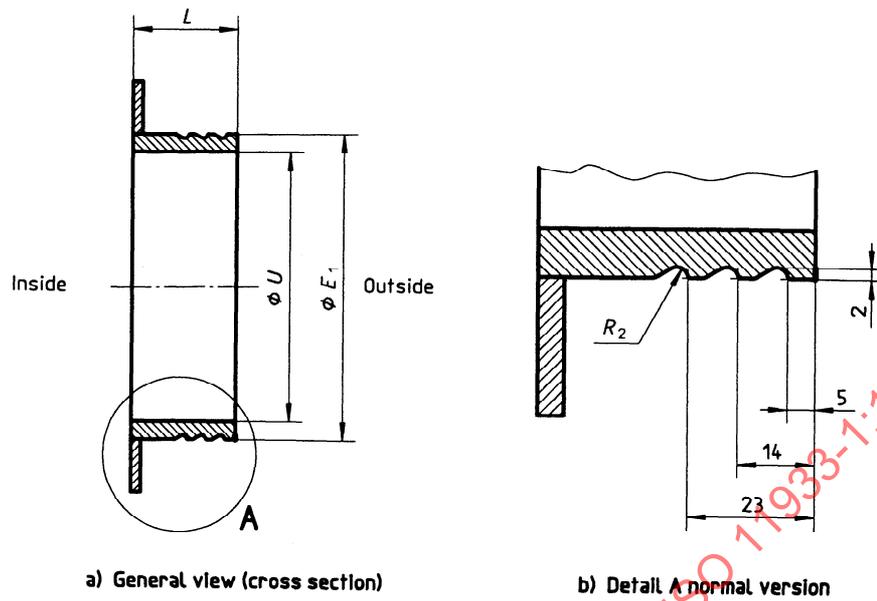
Example and dimensions of bonded or welded glove/bag ports having three external grooves
